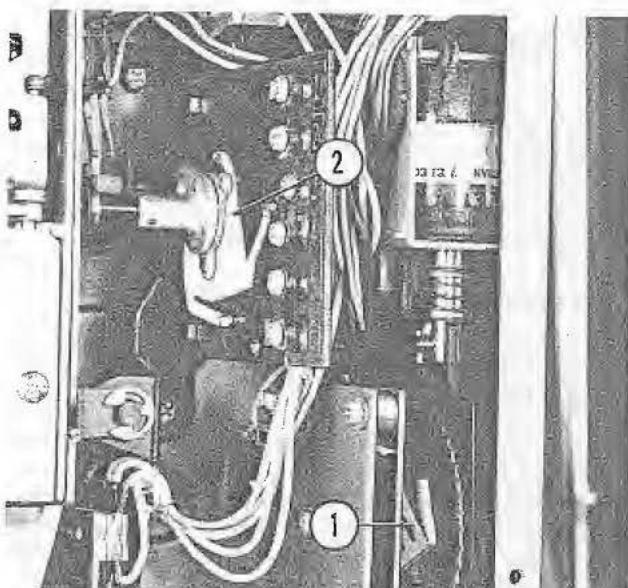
CONTACT PRESSURE ADJUSTMENT, PRINTED BOARD
